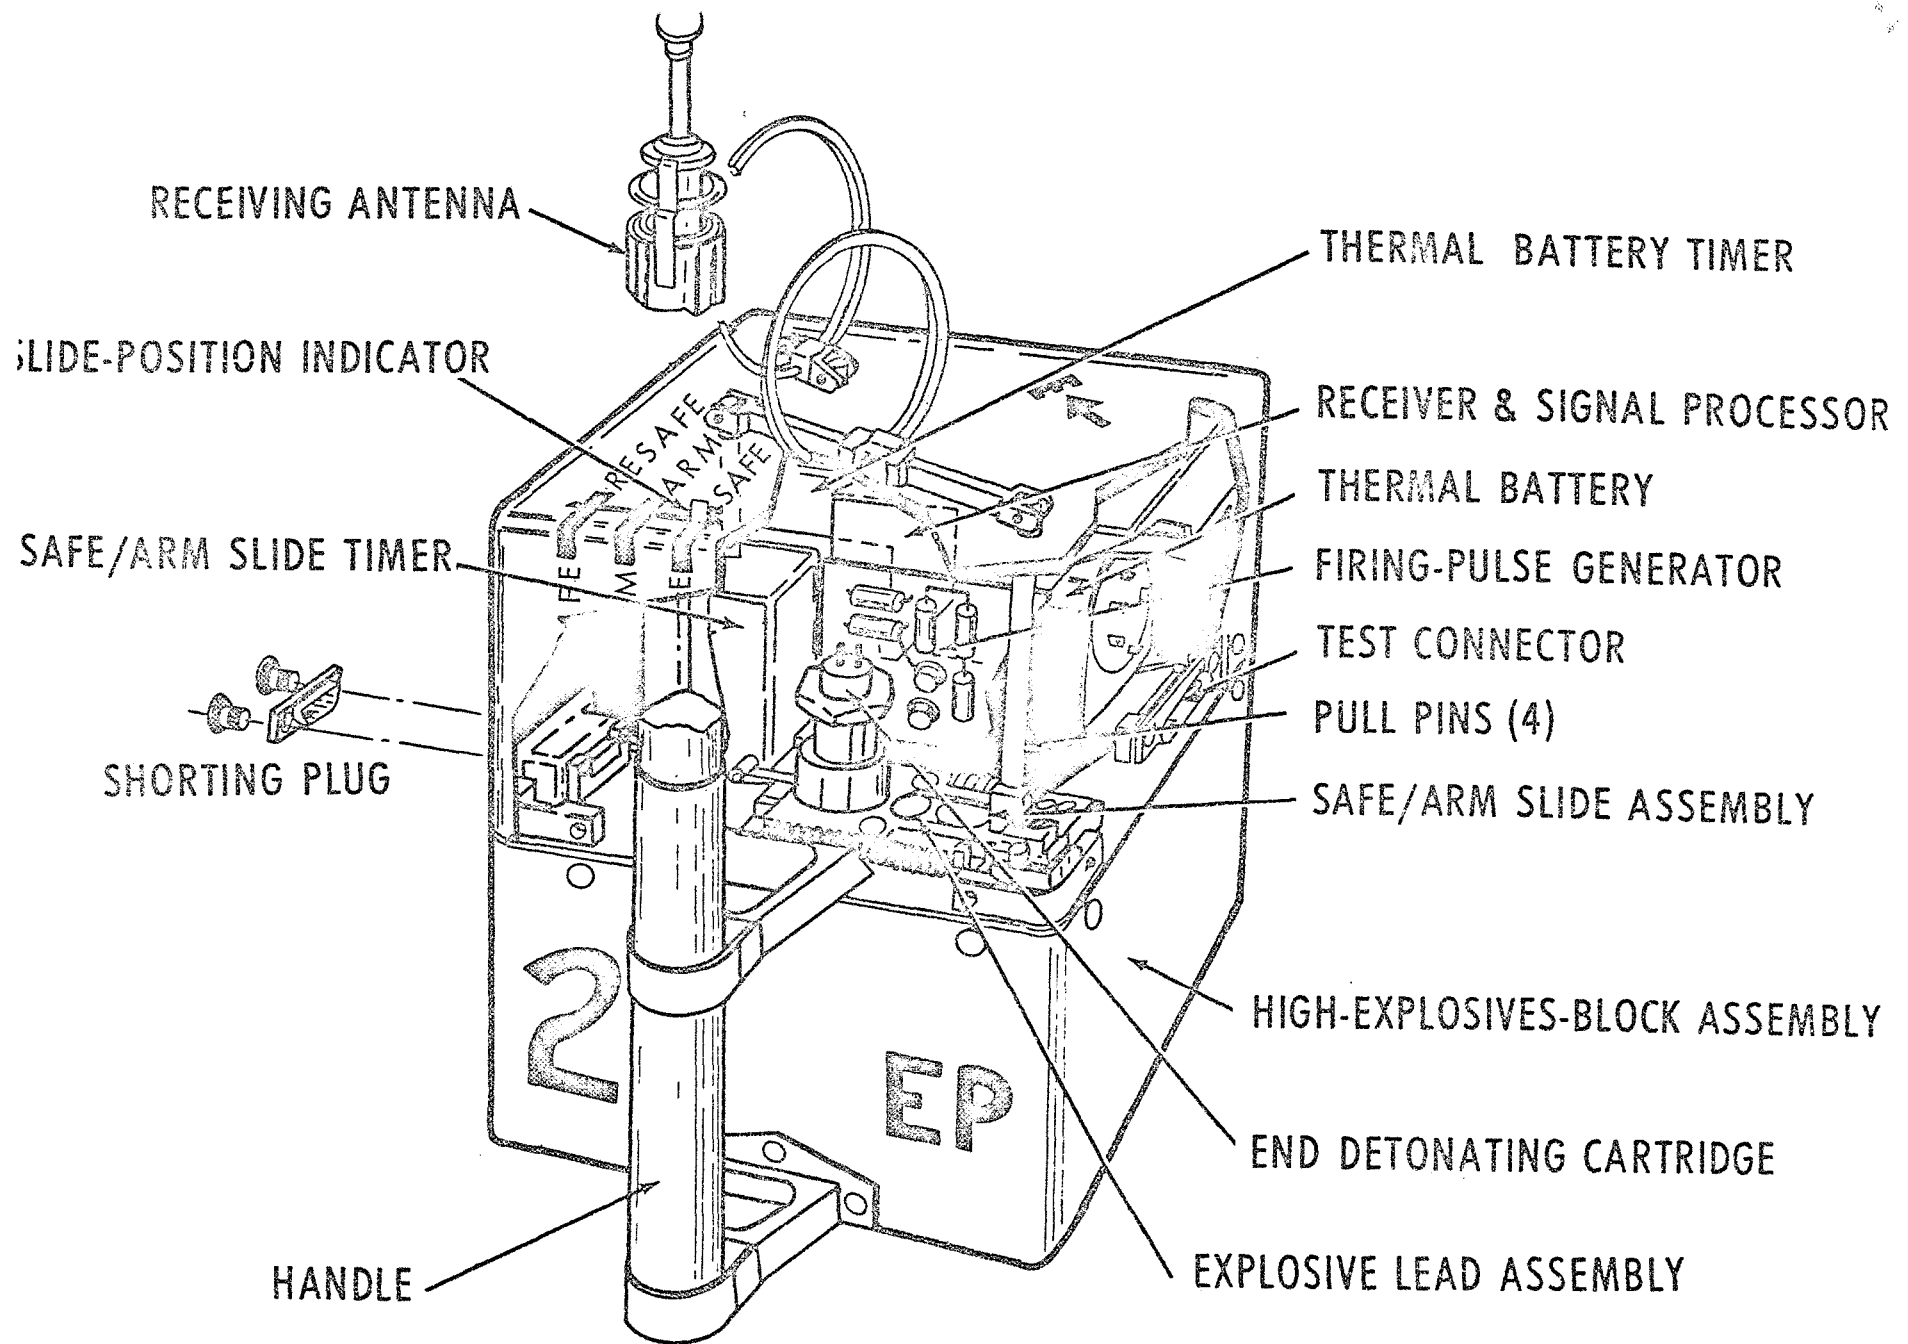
LSPE EXPLOSIVE PACKAGE ASSEMBLY (BENDIX AEROSPACE)
